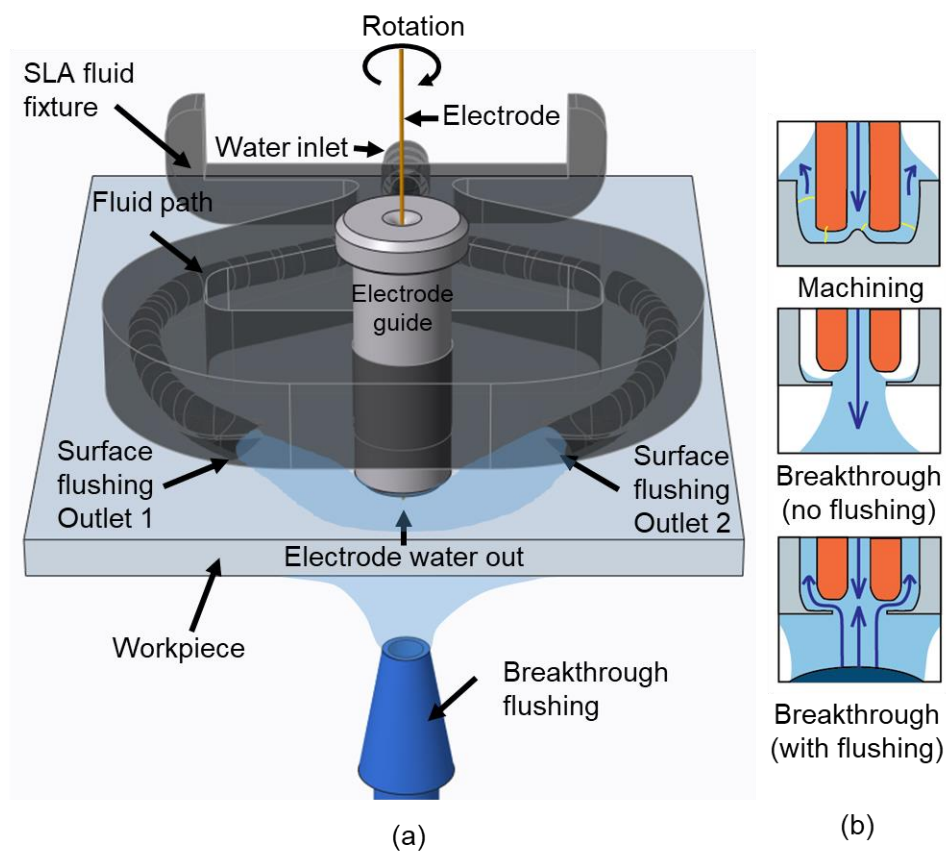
0.3 mm initial oxide formation experimental set-up using a hollow brass electrode using surface and breakthrough flushing. a) Shows normal machining, b) shows breakthrough without and with breakthrough flushing.
